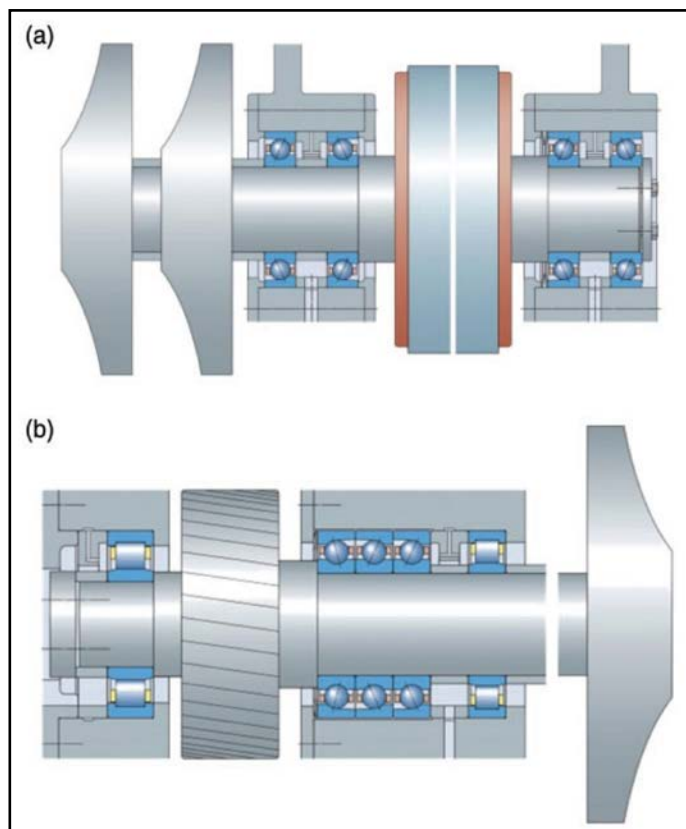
(a) A two-stage compressor with impeller positioned at one side of the extended motor shaft. The bearing arrangement made of two back-to-back pairs of high-speed angular contact ball bearings; (b) high-speed shaft, gear drive, tandem thrust bearings.
